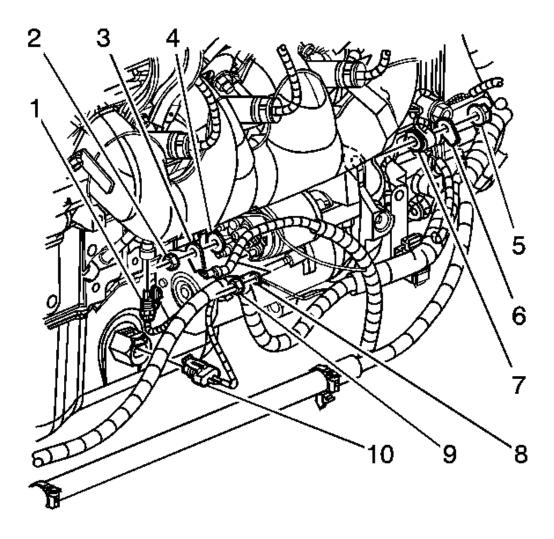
View Of Engine Electrical Connectors (Left Side) Courtesy of GENERAL MOTORS CORP.
